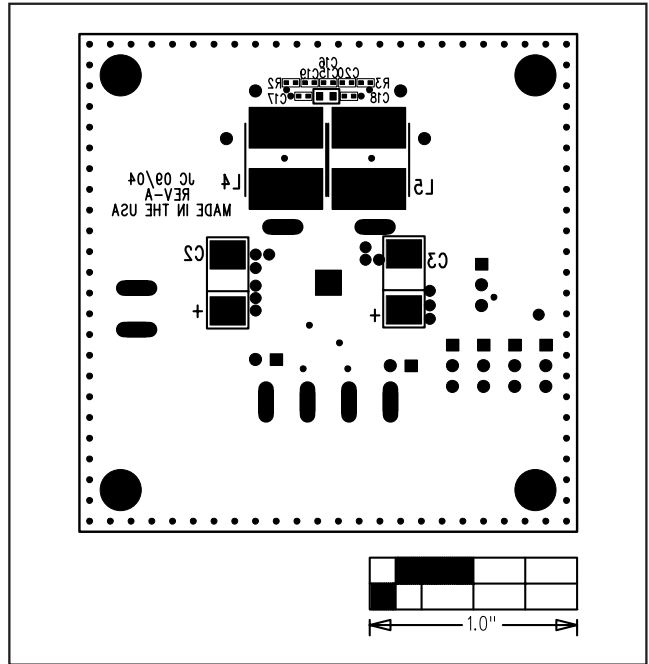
MAX9713 EV Kit Component Placement Guide—Solder Side
